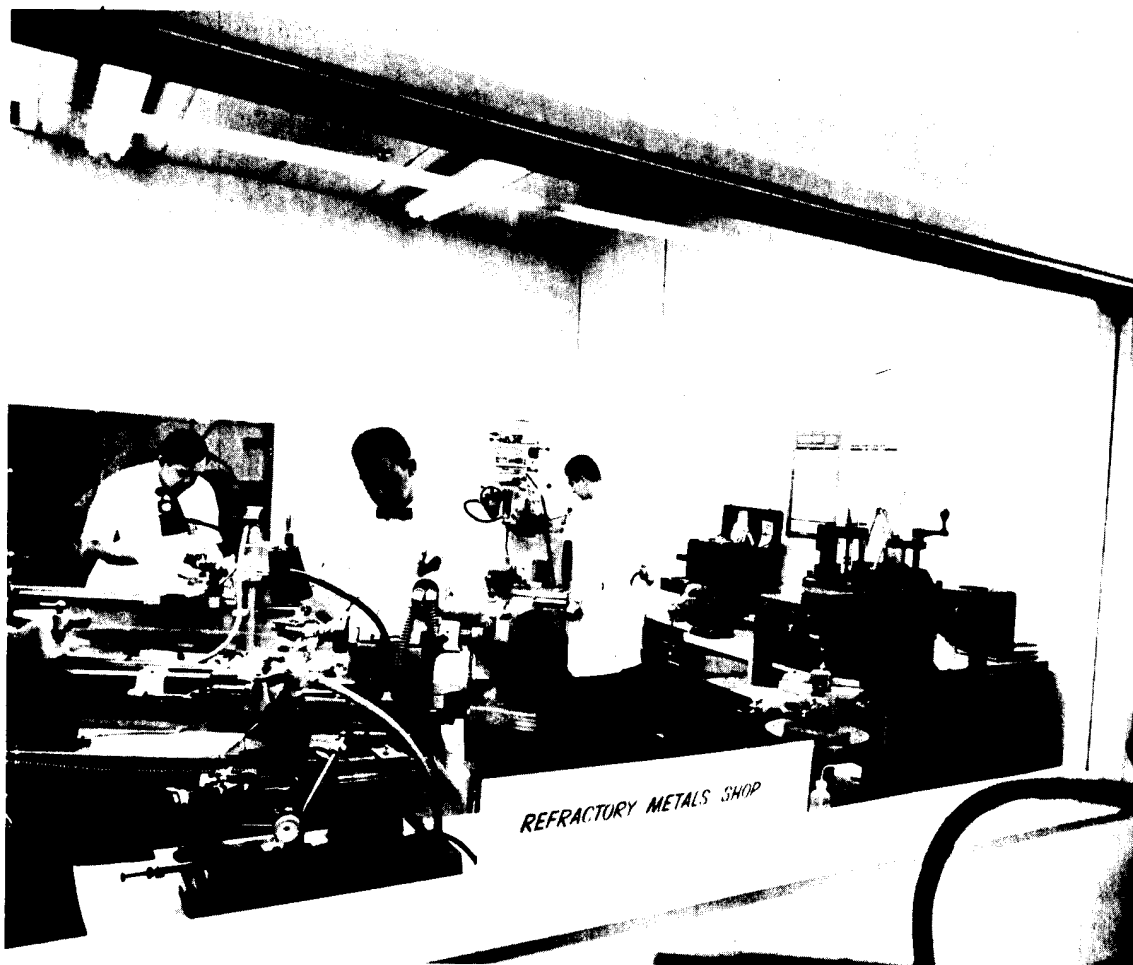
REFRACTORY METAL MACHINE SHOP
